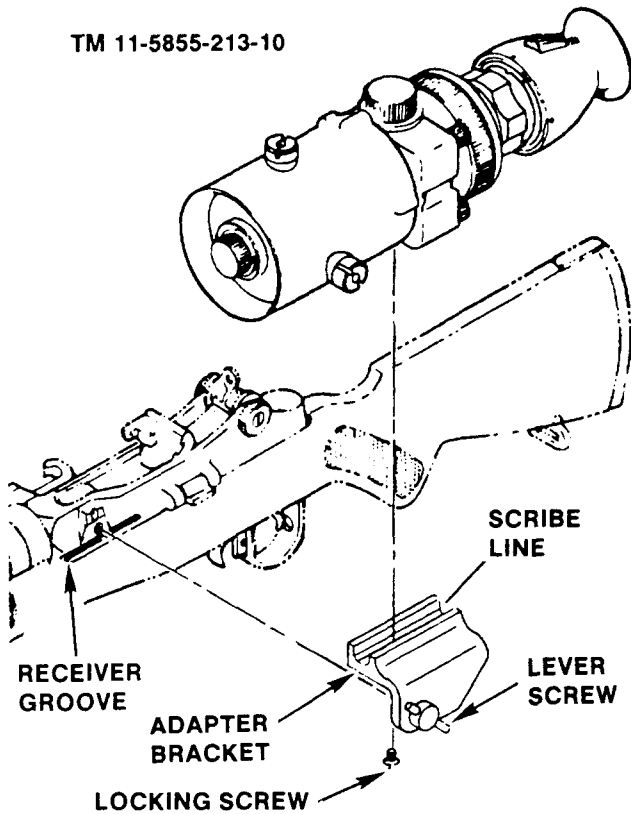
Installation of Mounting Bracket Assembly, M14.
